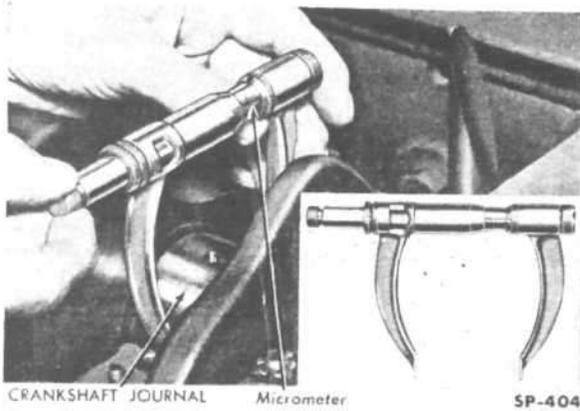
MEASURING CRANKSHAFT JOURNAL DIAMETER
